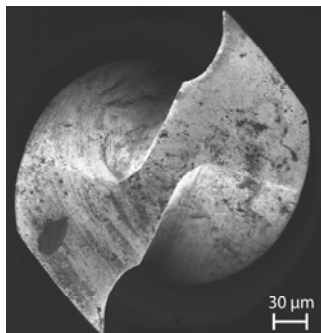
An NCD coated end mill after 50 mm of milling indicating no edge fracture.
